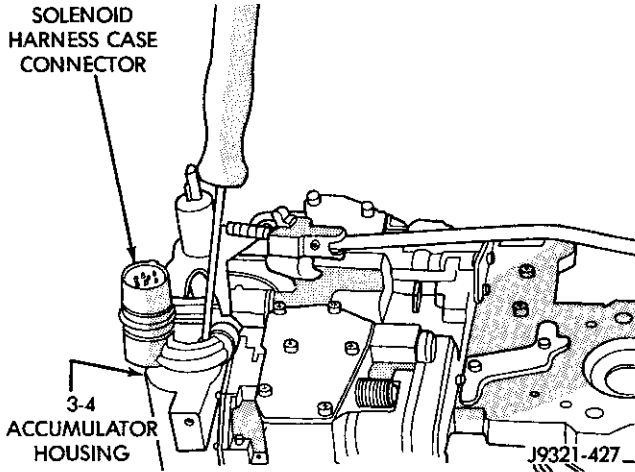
Solenoid Harness Case Connector Shoulder Bolt
